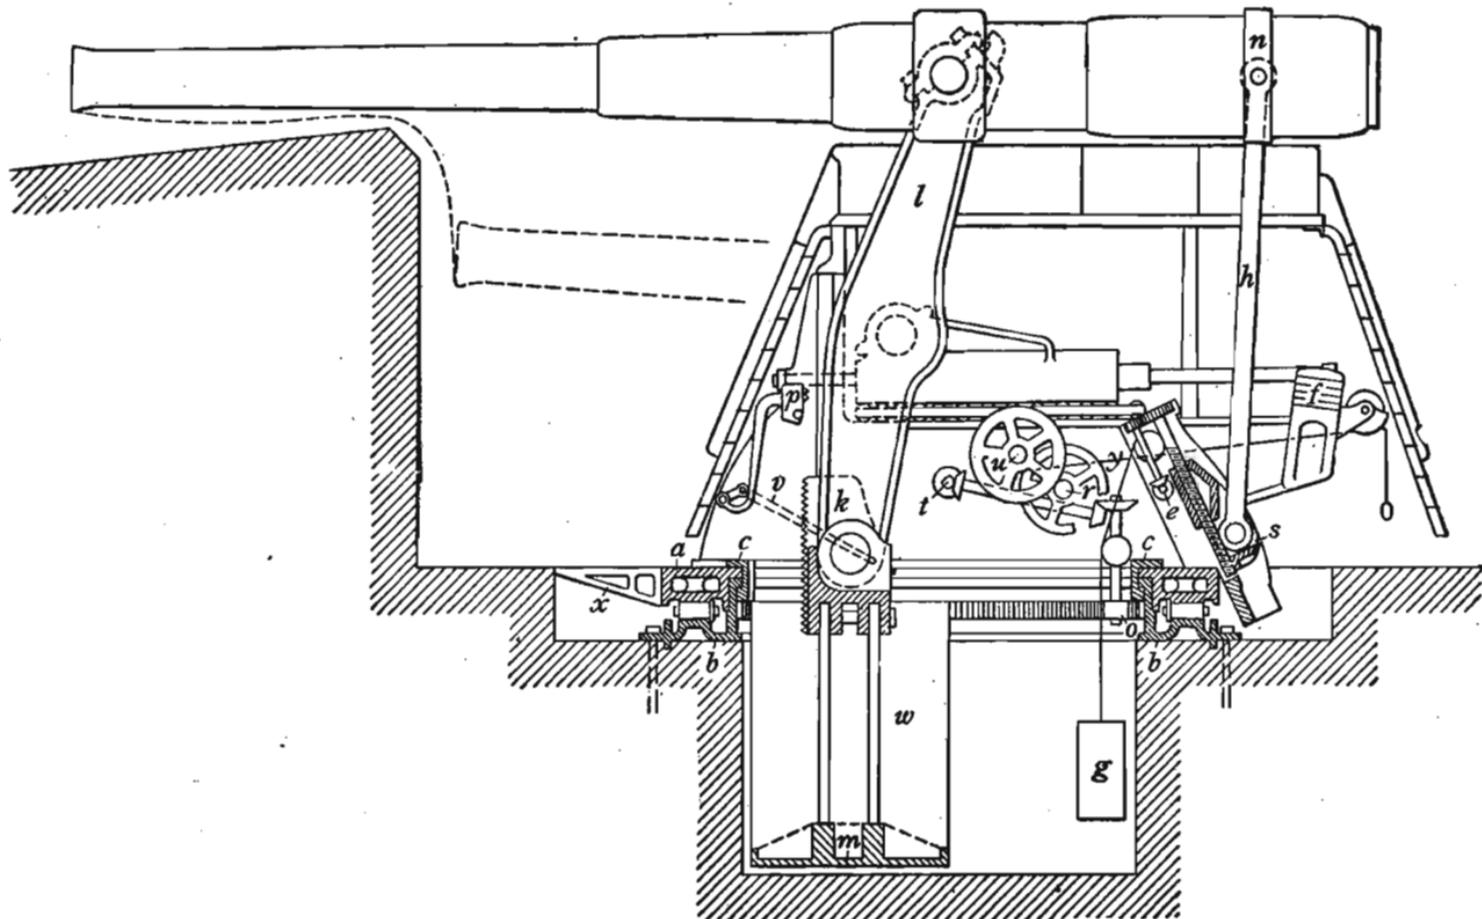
12-inch Gun on Disappearing Carriage, Firing Position.
